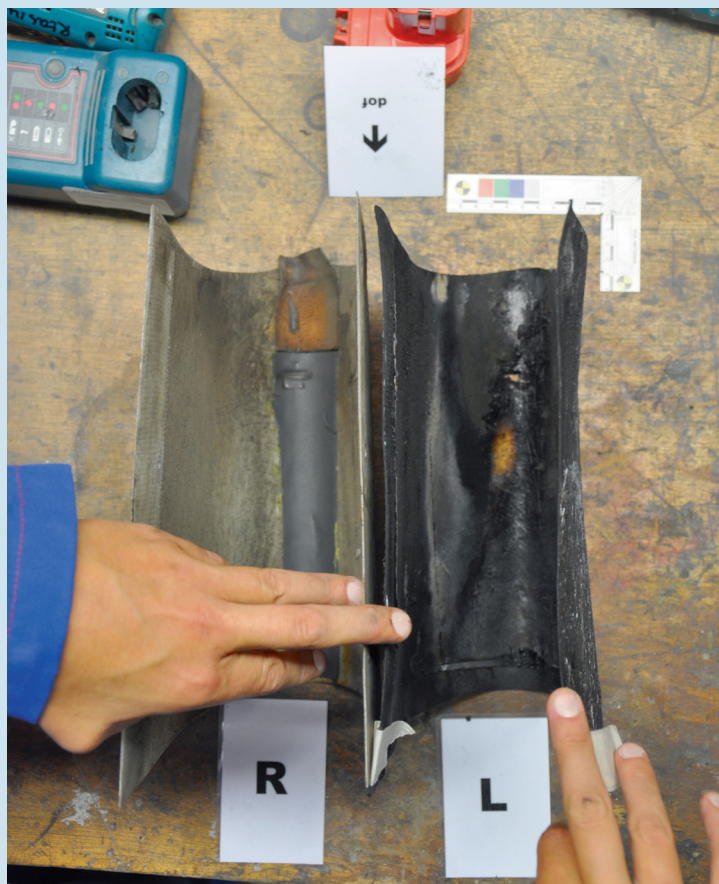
Inside view of left and right strut fairings. (Photo: Dutch Safety Board)
